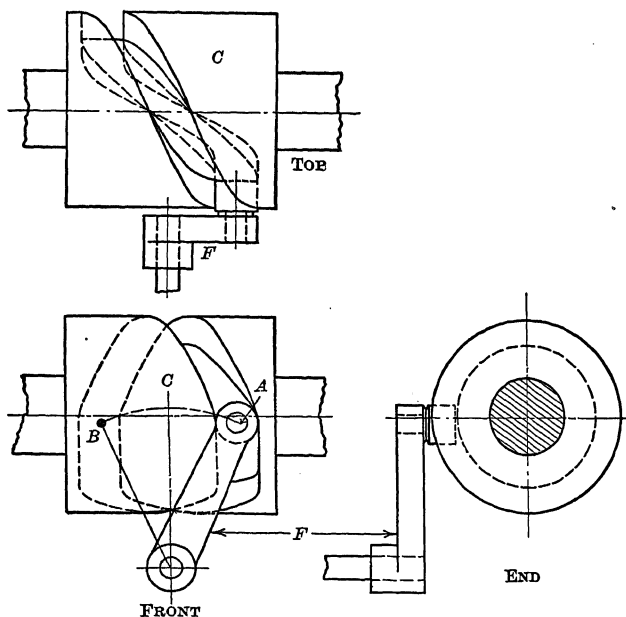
CYLINDRICAL CAM AND SWINGING FOLLOWER
